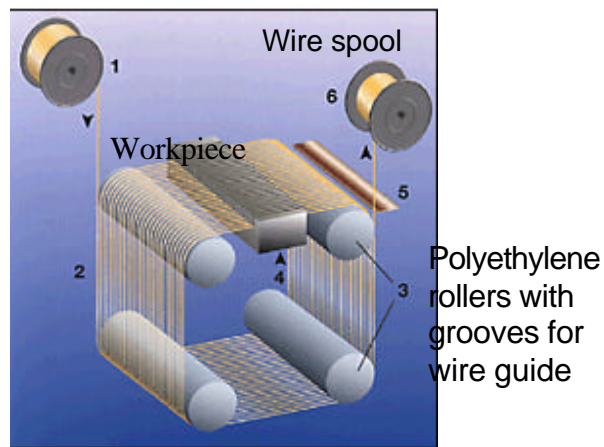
An illustration of wire saw machining a wafer. Bekaert[2]
